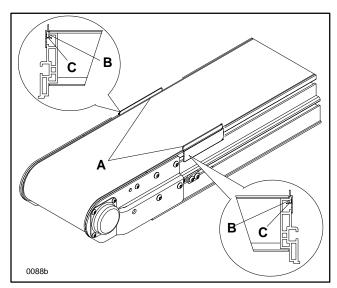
Conveyor Low Side Belt Tracking Guide Installation Detail
